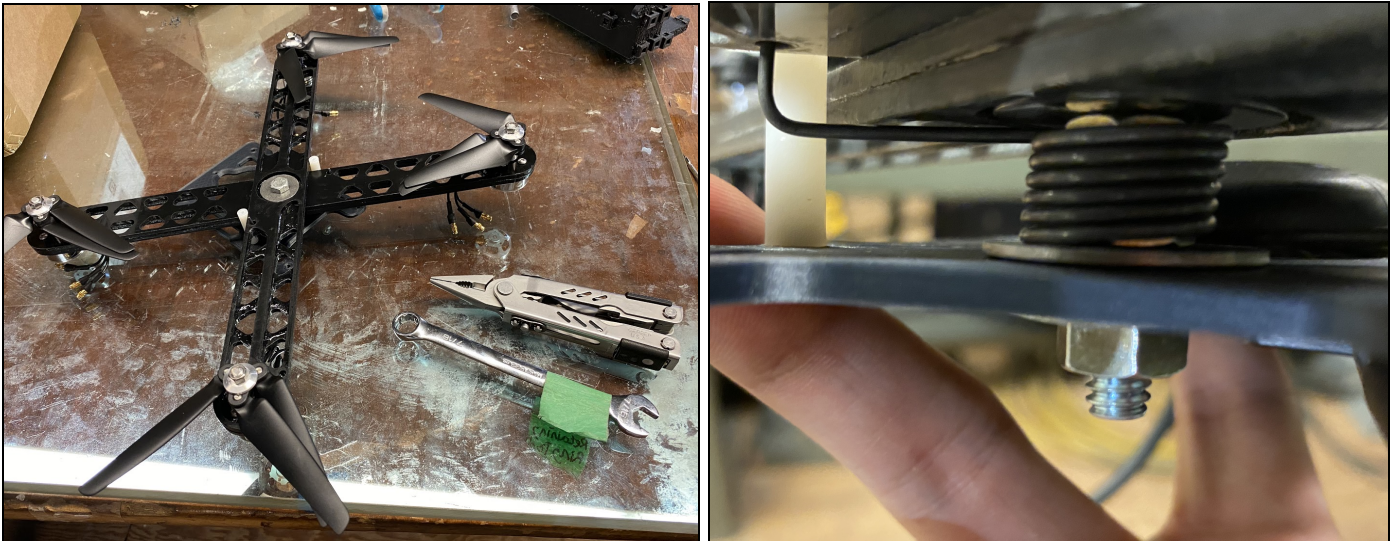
Assembled X-Wing Mechanism w/ Limiting Standoffs (Left), Axial Closeup (Right)
